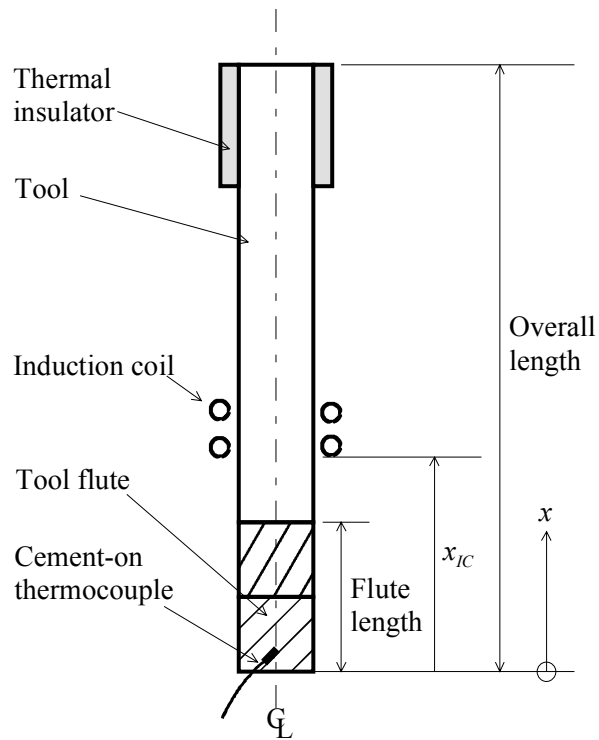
Configuration of end mill, thermal insulator, water-cooled induction heating coil, and thermocouple.
